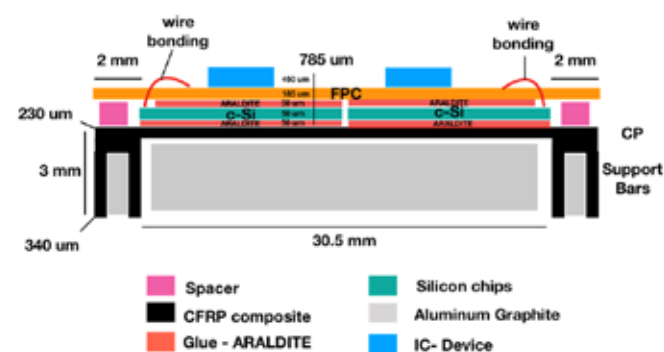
A cross-section of one stave in the mechanical unit showing the new concept with the internal structure of ply lay-up composites, the cold plate (CP), the support bars, the c-Si (ALPIDE) chips, and the FPC board containing the control electronics.
